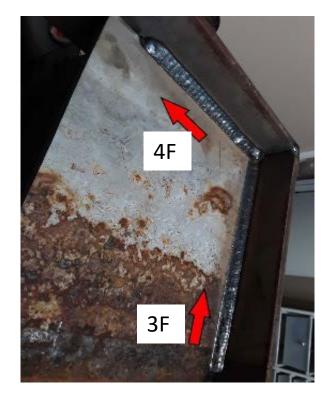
Procedure Qualification Test Assembly for Fillet Welding Over Primer-Coated Surfaces
